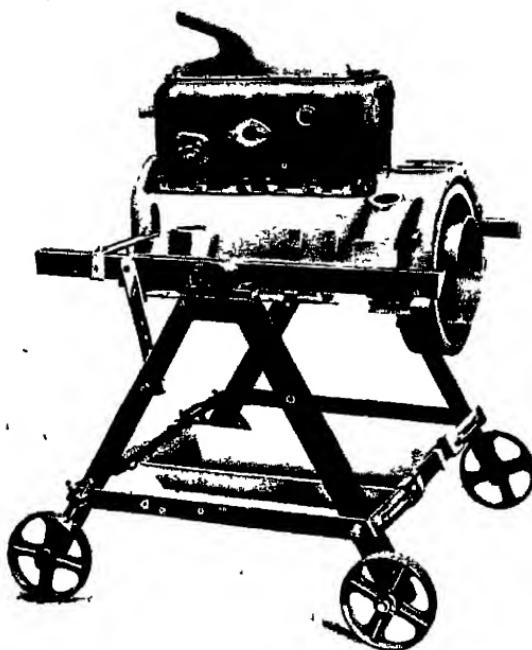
REVERSIBLE STAND ADJUSTABLE FOR ENGINES
